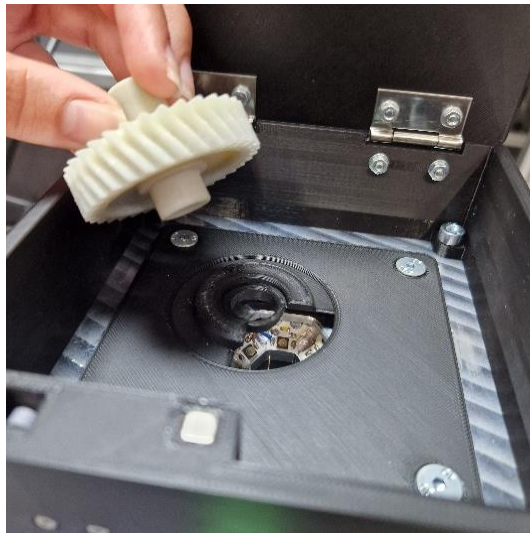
Printed gear wheel consisting of ABS and Polysecure tracing particles with fixture.
